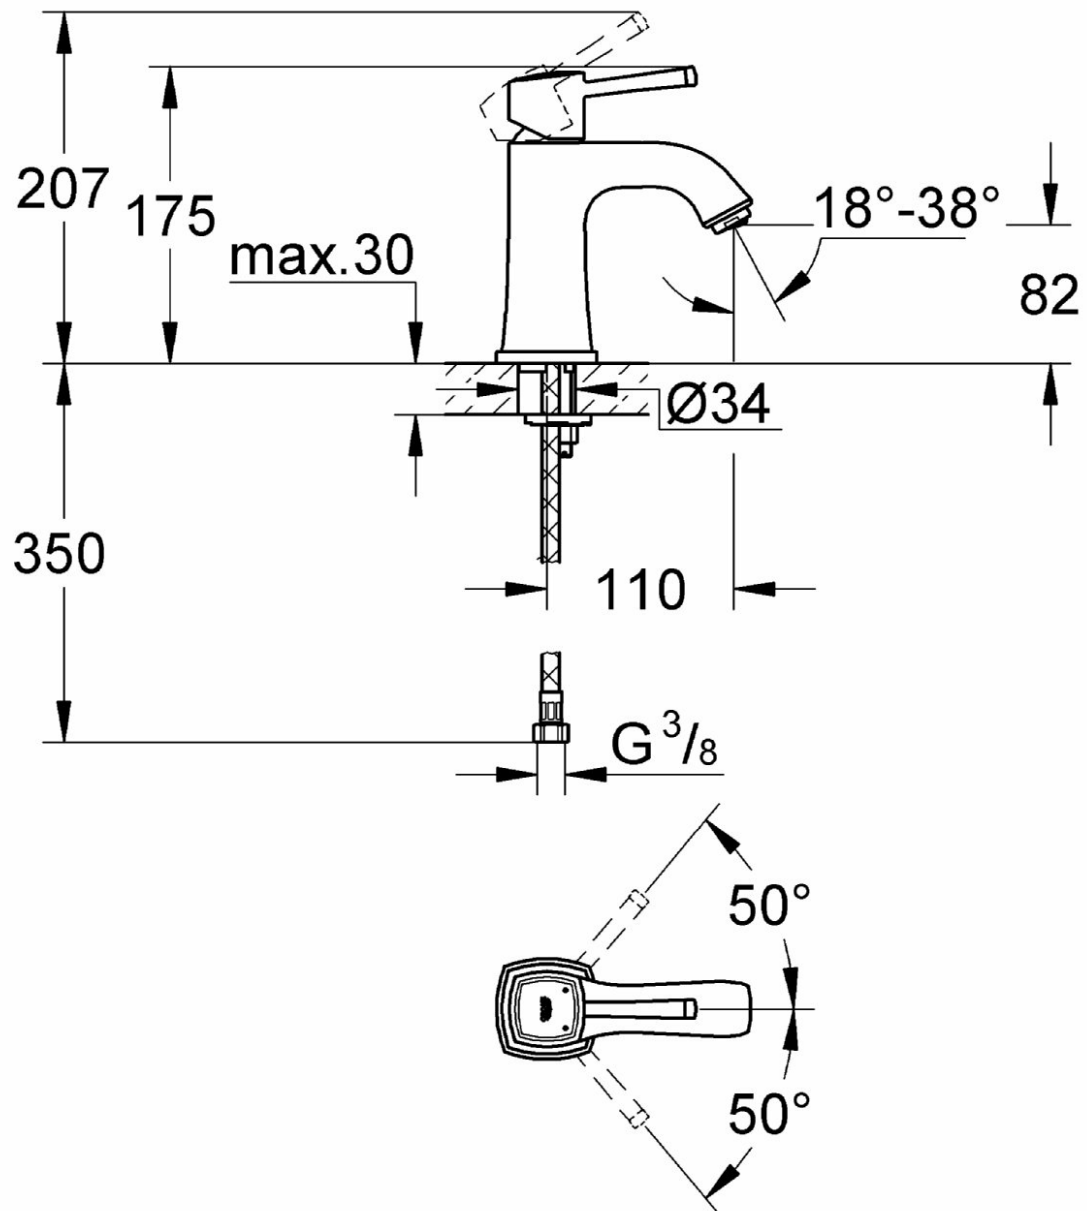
Technical drawing illustrating the dimensions and installation requirements for the faucet.
